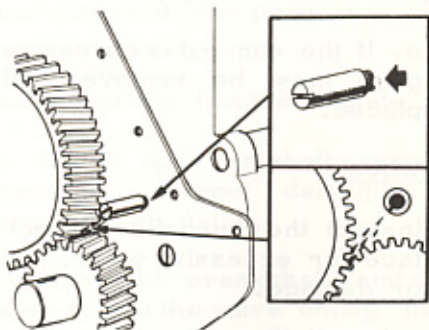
Installing Timing Gear Oil Nozzle X4968
